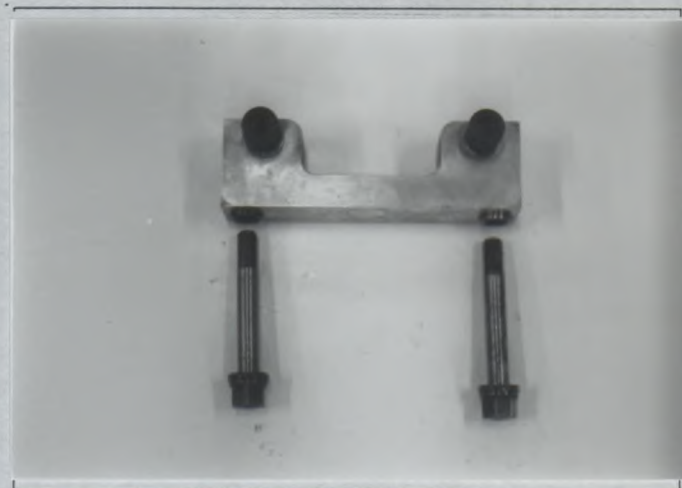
FRONT AND/OR REAR BRAKE CALIPER
